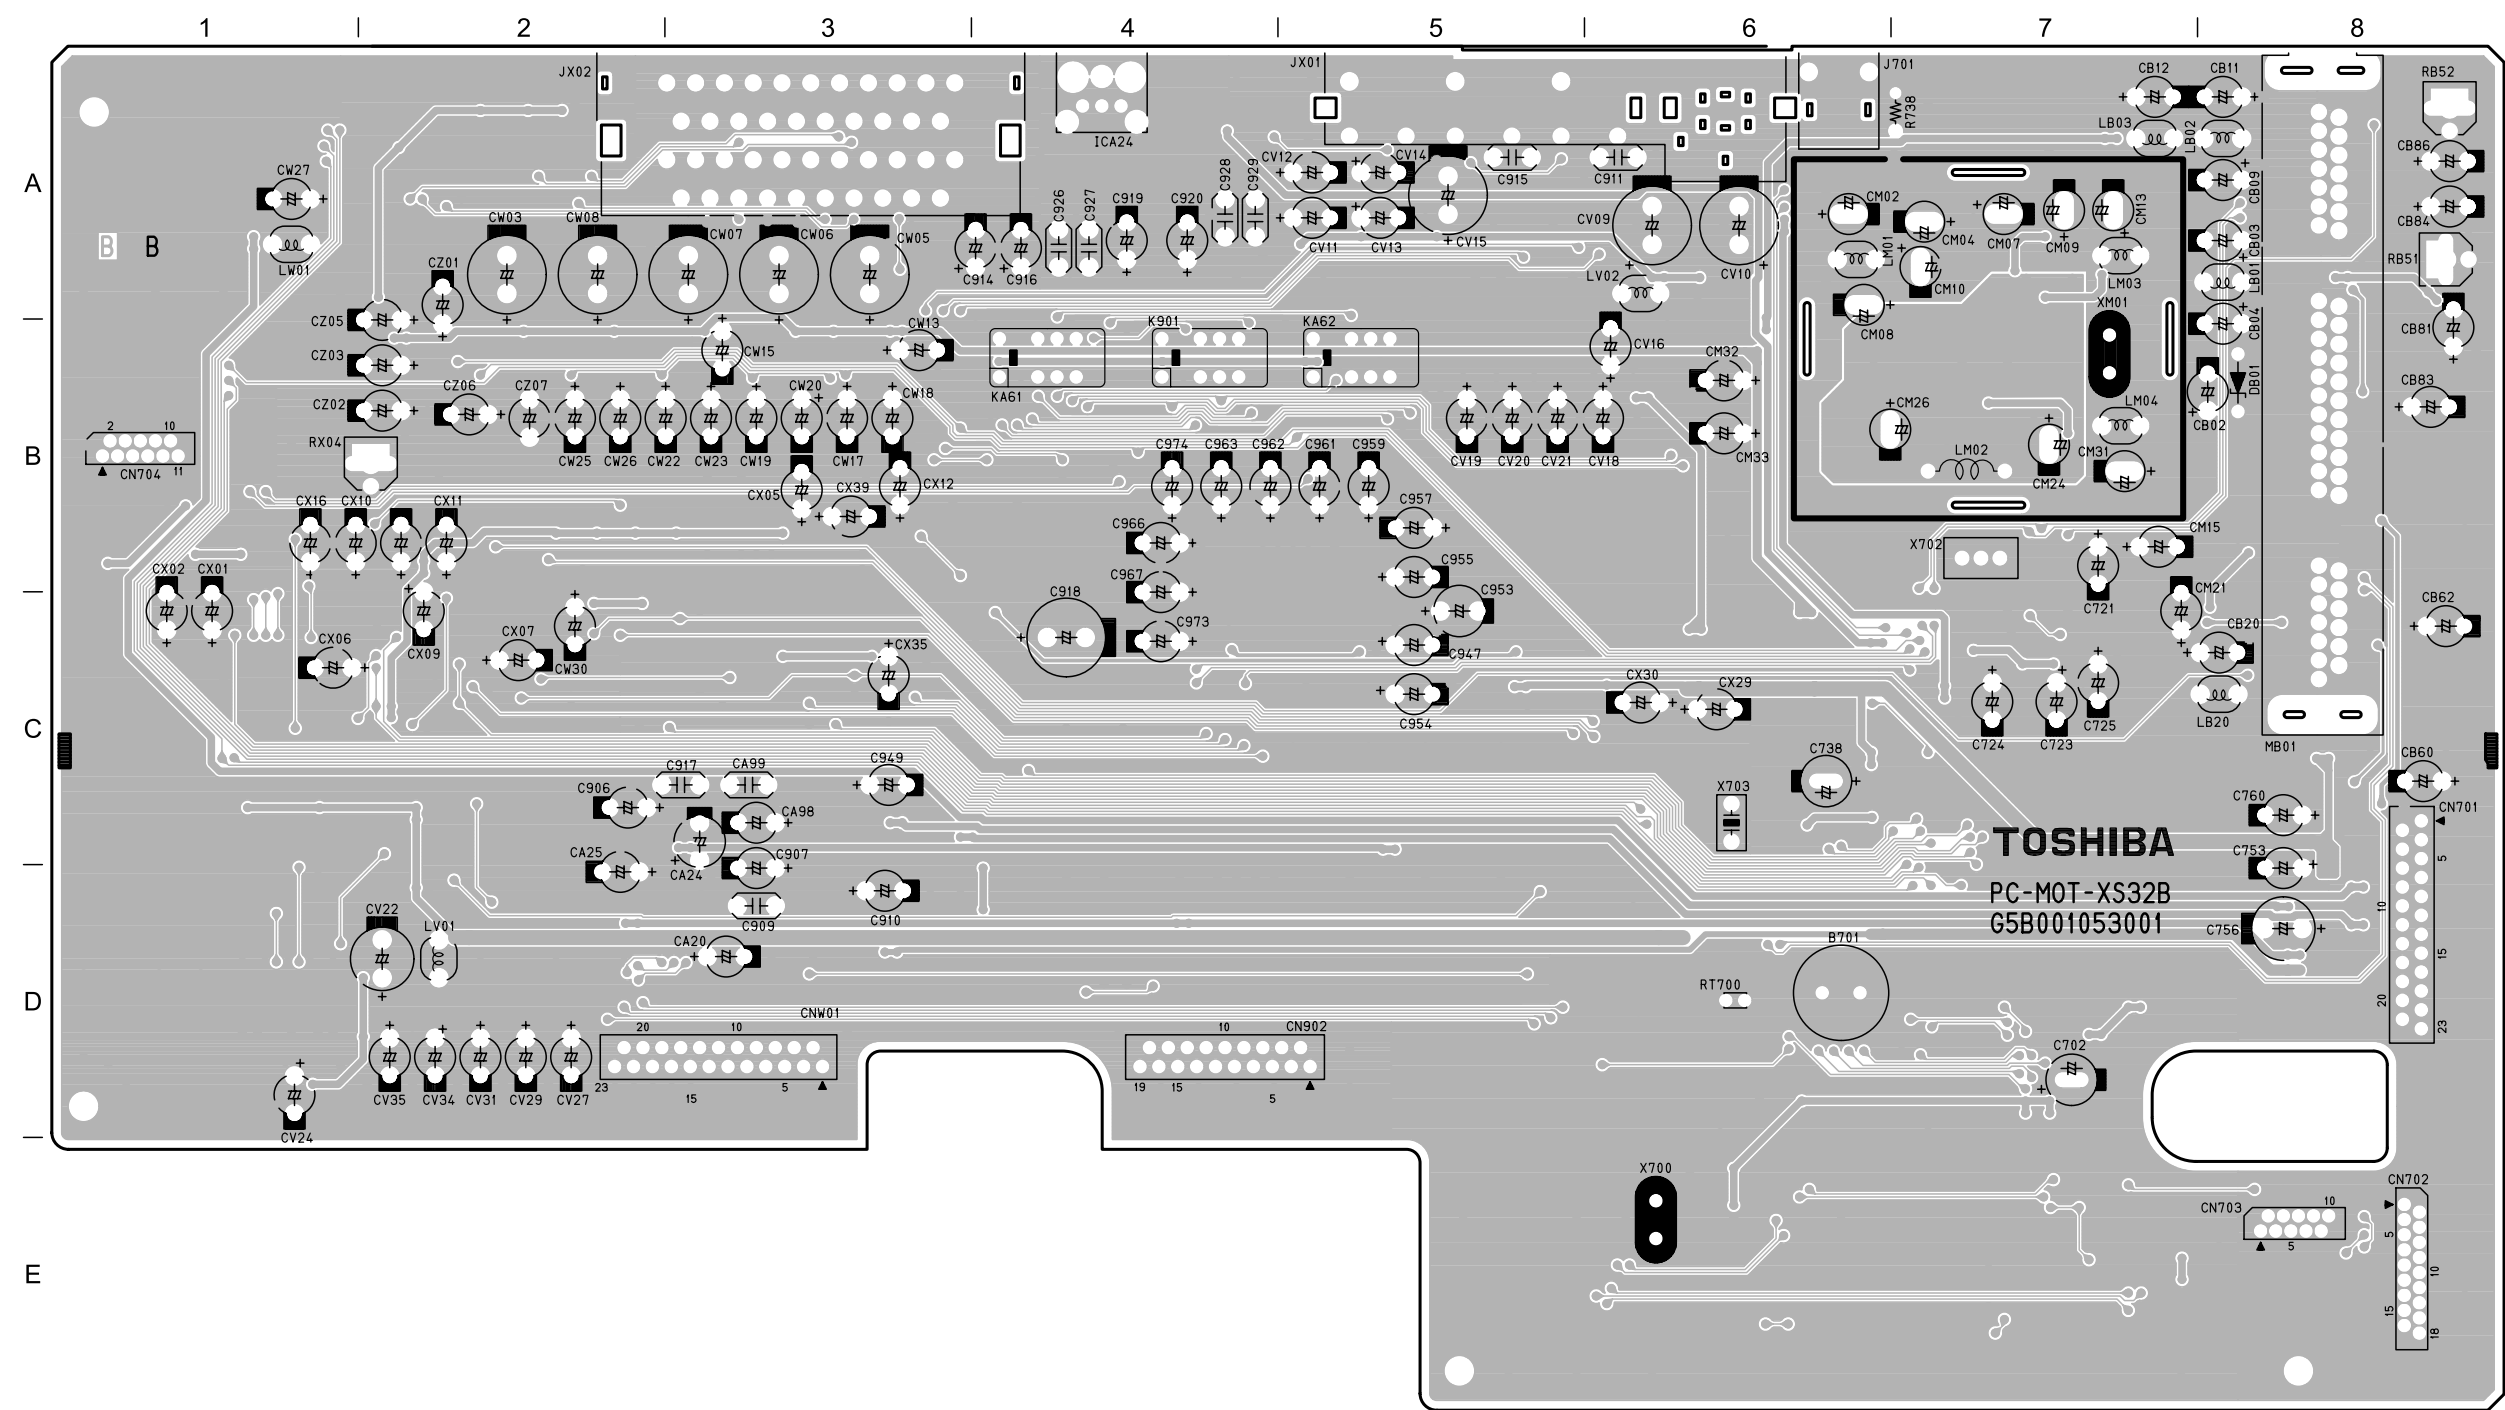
EU05 Mother PC Board (Top side)
